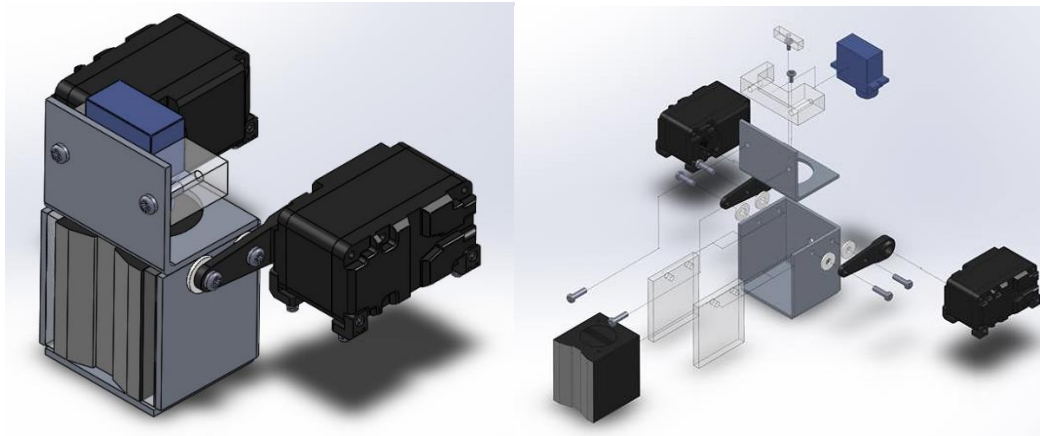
CAD model of package acquisition sub-system and its exploded view
